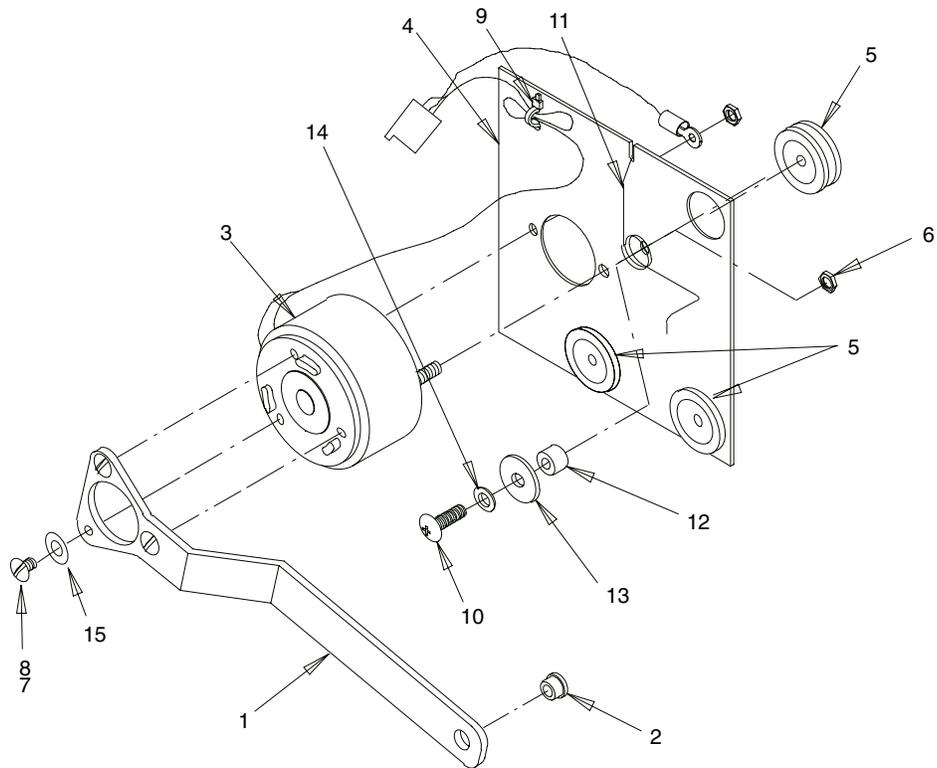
ELECTRICAL BOX ASSEMBLY
